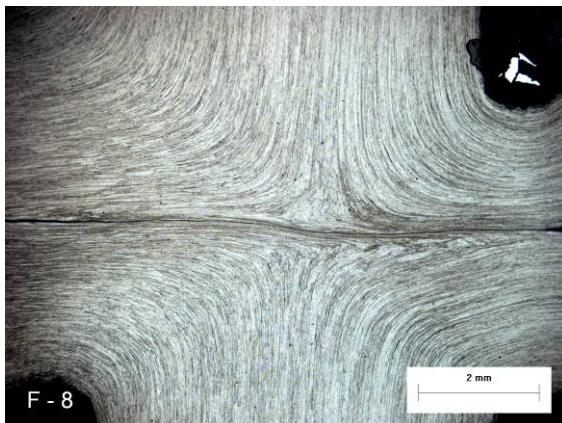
Flash Butt Weld of MA956 to Itself with Inadequate Upset
